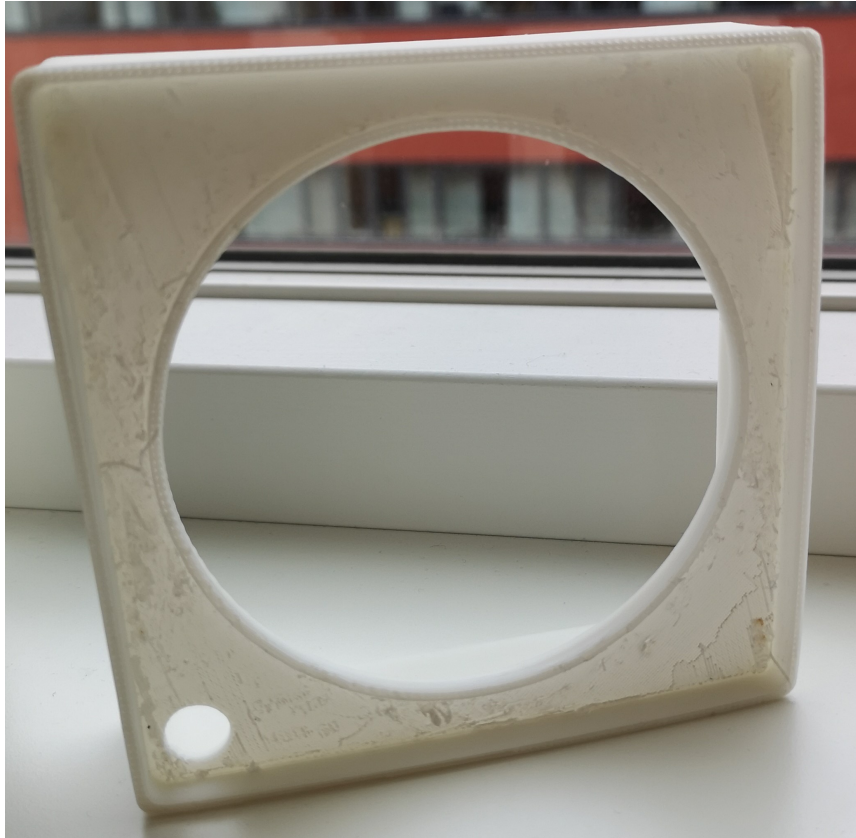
Second 3D-printed prototype with screw threads, A1.
